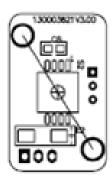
Drive Gas Pressure Sensor Board, Bottom View
